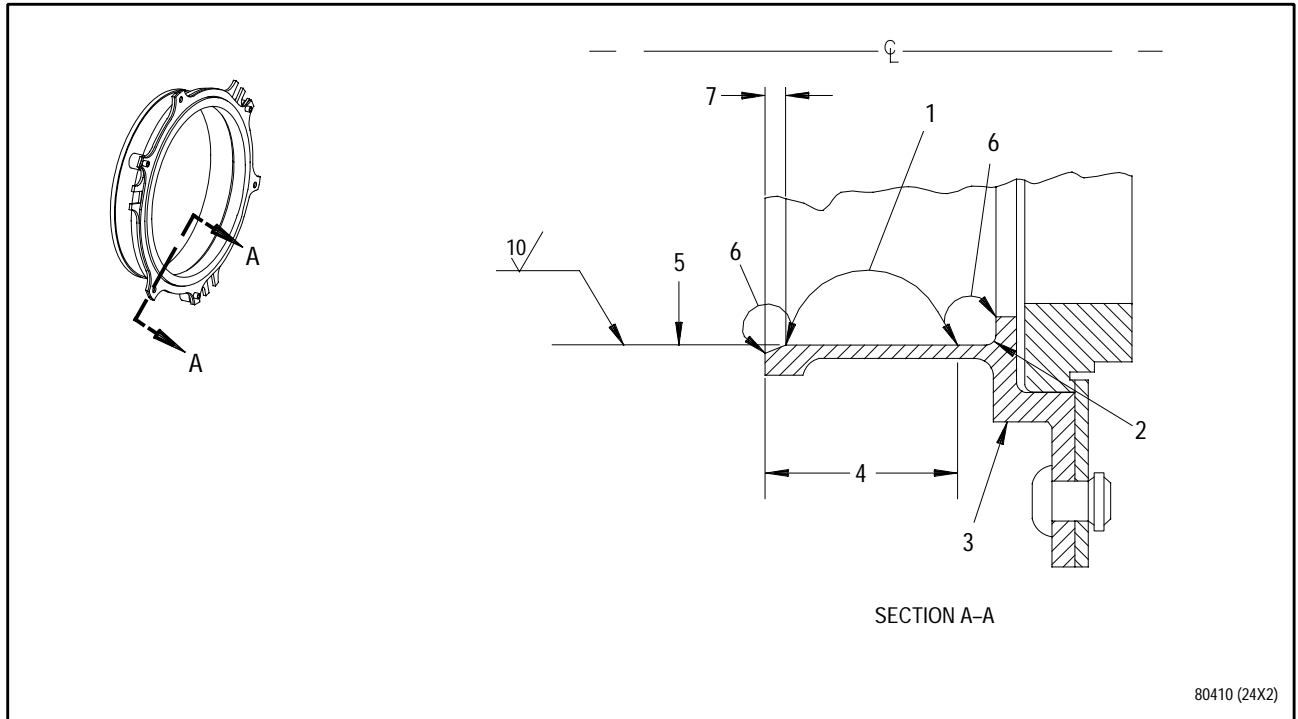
No. 2 Bearing Front Face Seal Assembly - Face Seal Element Lapping Repair
